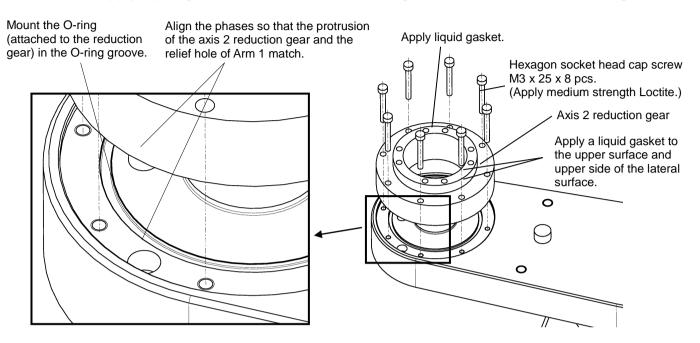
Mounting axis 2 reduction gear (KHL-300, KHL-400)
